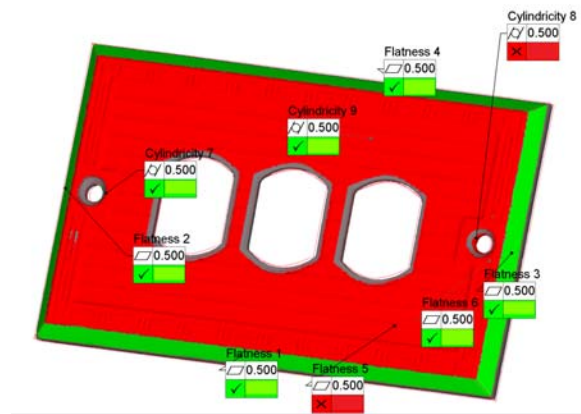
GD&T Callouts from the Original CAD Model of the Electrical Socket Cover
